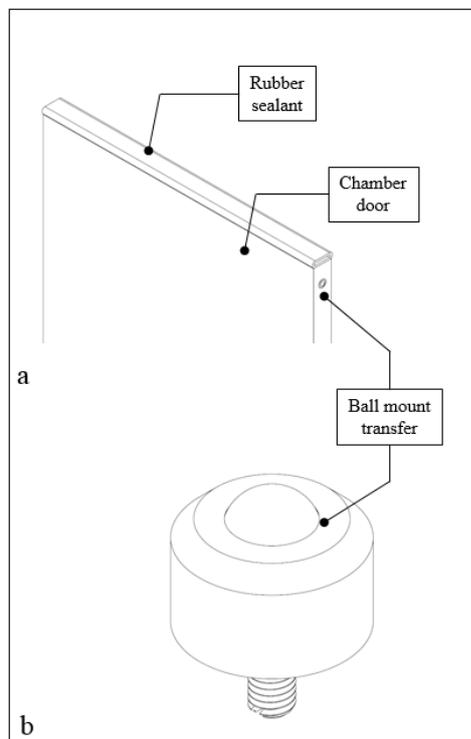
a) Chamber door & b) Miniature ball mount transfer (McMaster-Carr 2015e, p. 1311).
